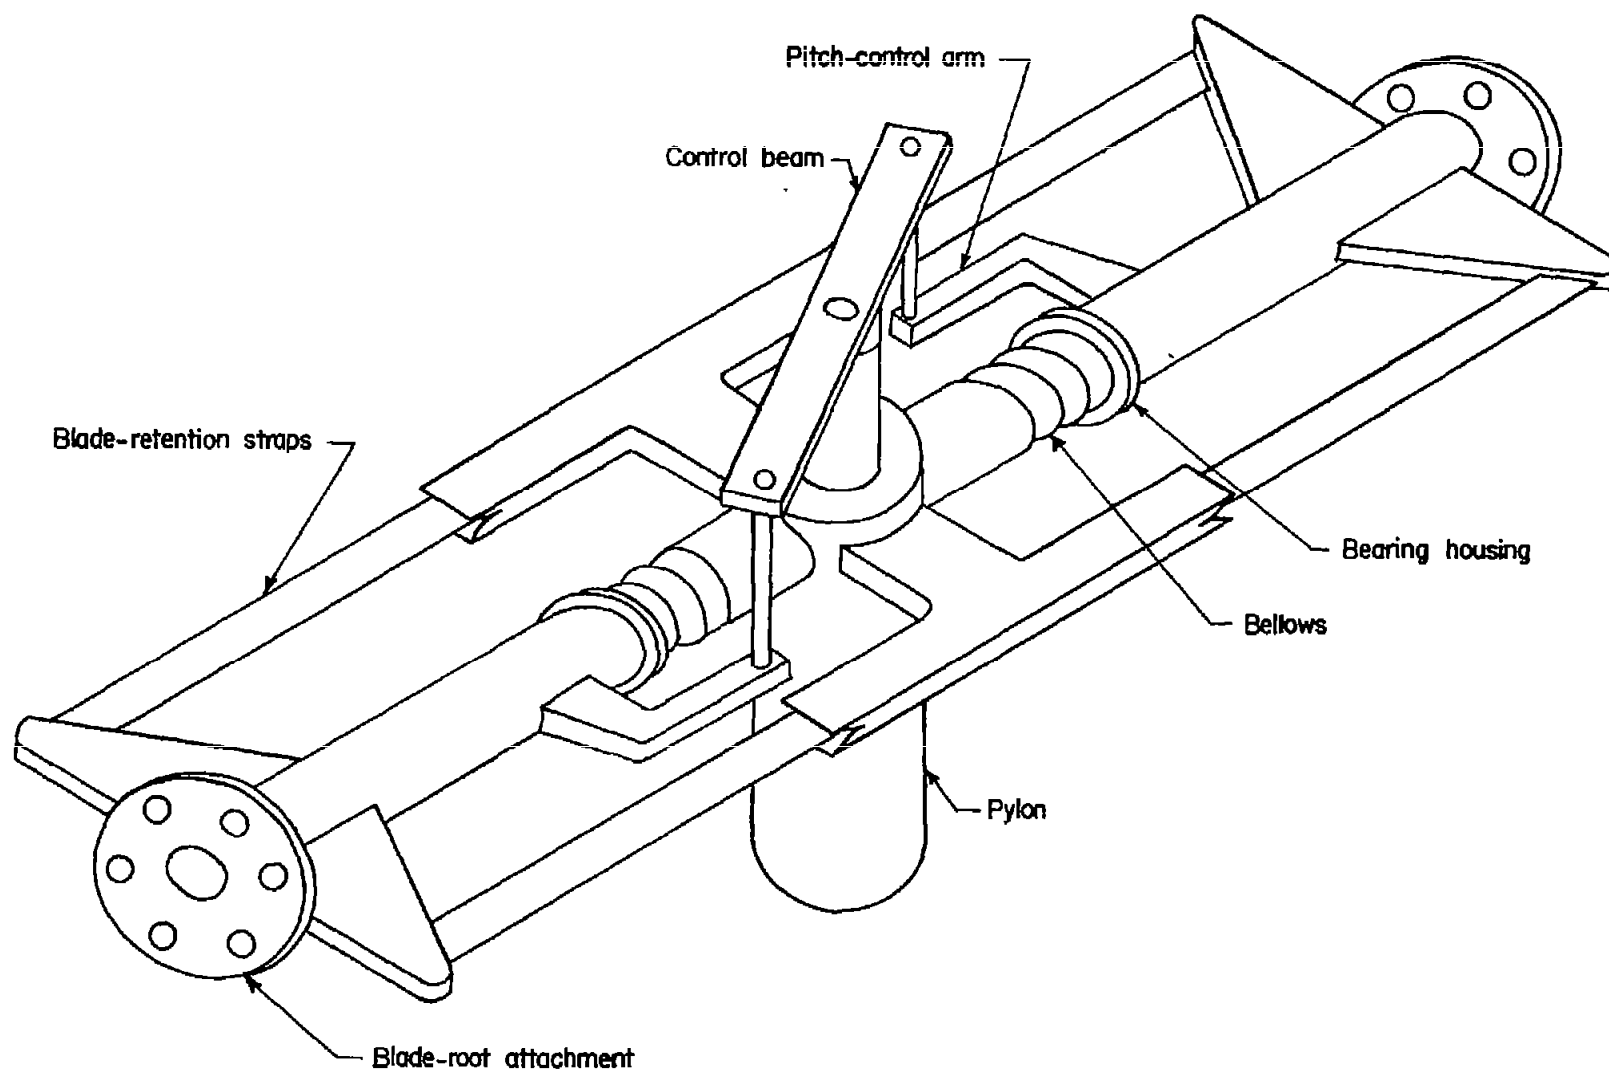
Schematic drawing of rotor hub showing blade-retention straps and control-beam installation.
